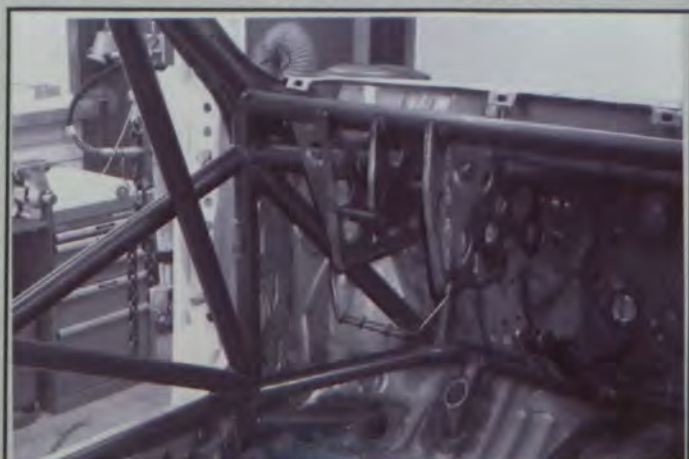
FRONT HOOP TO FLOOR (RIGHT)
